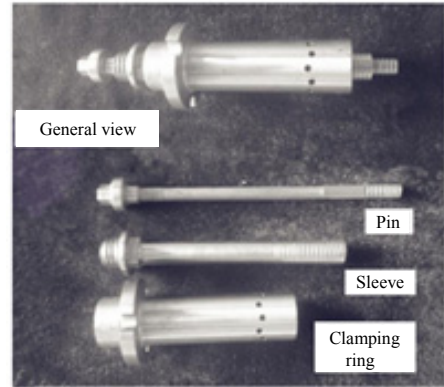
Modified refill friction stir welding tool¹²⁾
